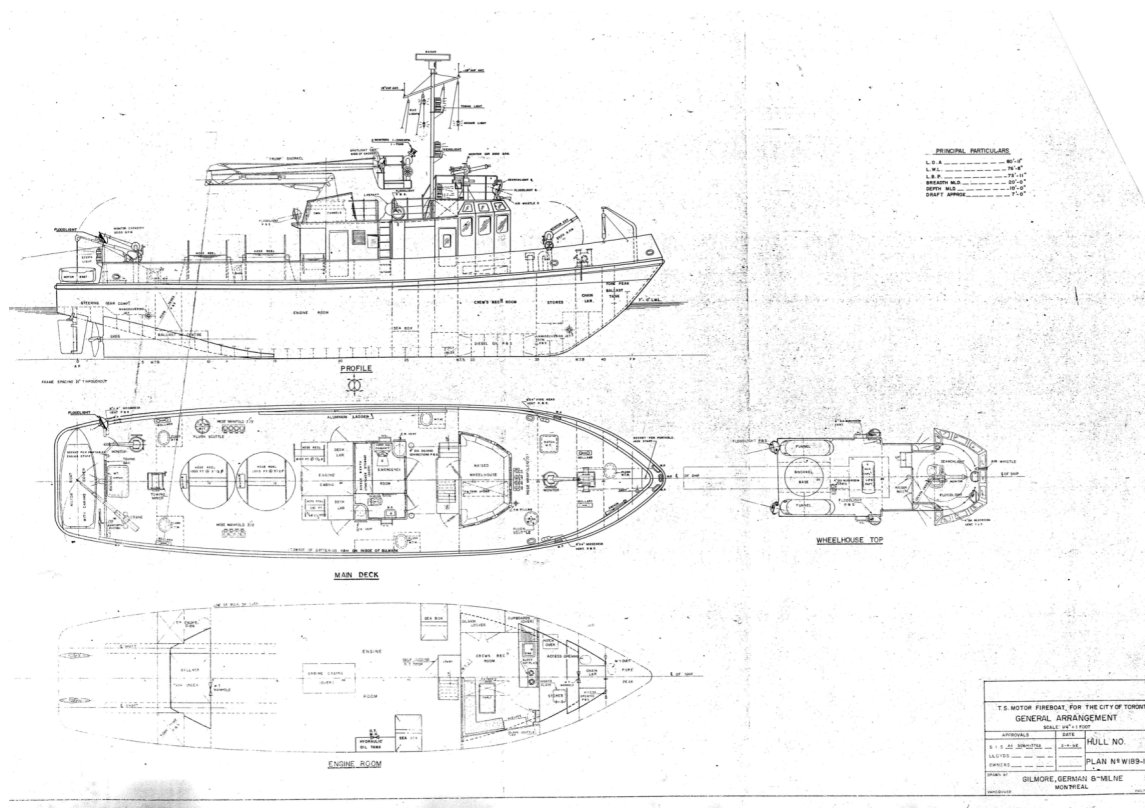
WM Lyon Mackenzie Deck Plan [3]
